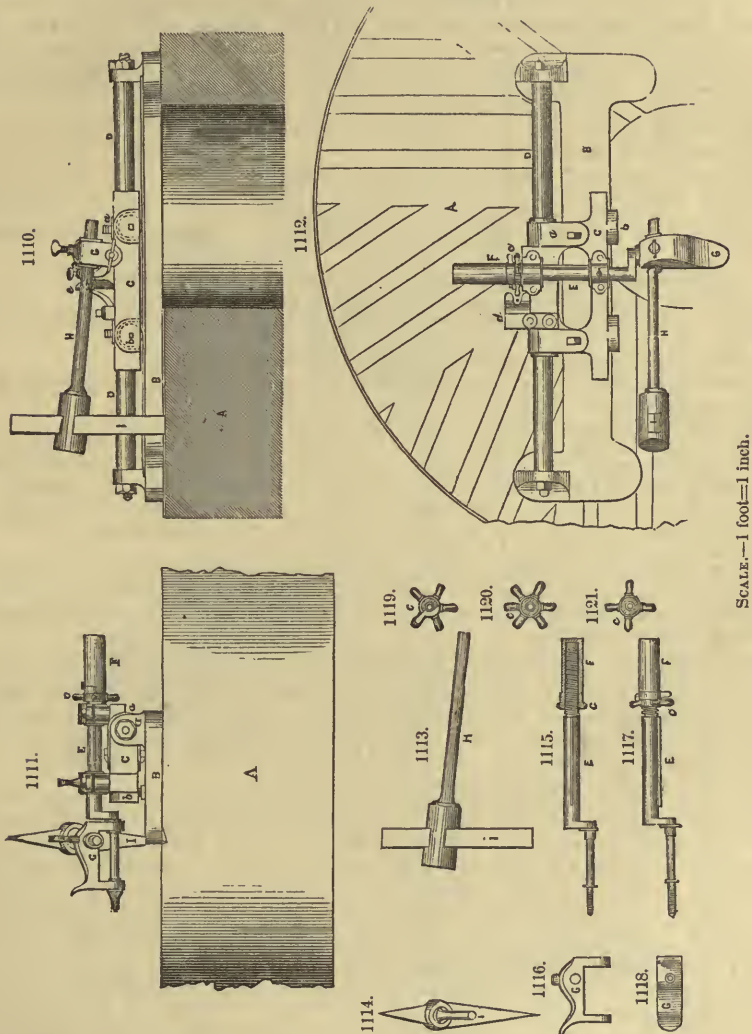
is a side elevation; Fig. 1111 an end view; and Fig. 1112 a plan of the entire machine.
